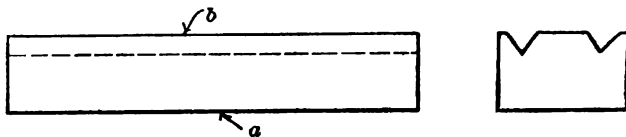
Casting to be Milled in Fixture shown in Fig. 28.
